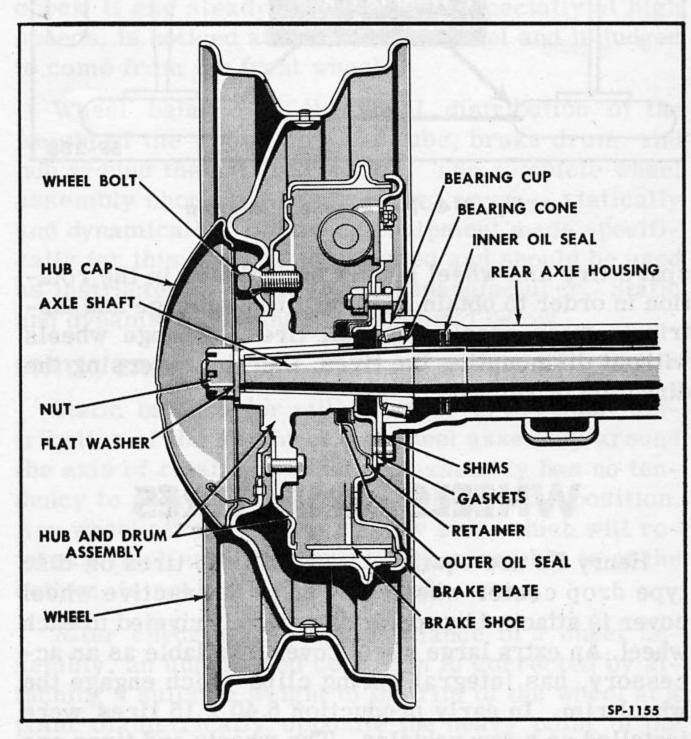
Sectional View of Rear Wheel and Hub-Installed
